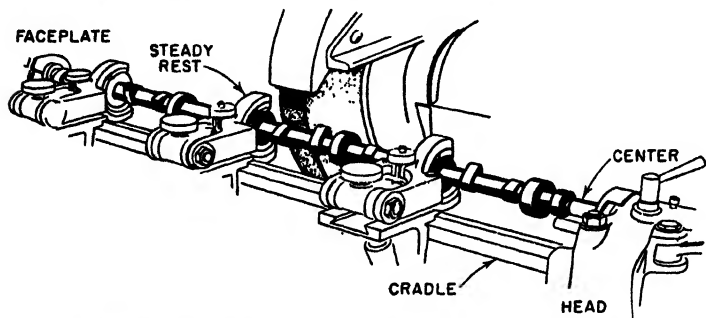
Camshaft grinding. (*The Socony-Vacuum Oil Company*)
